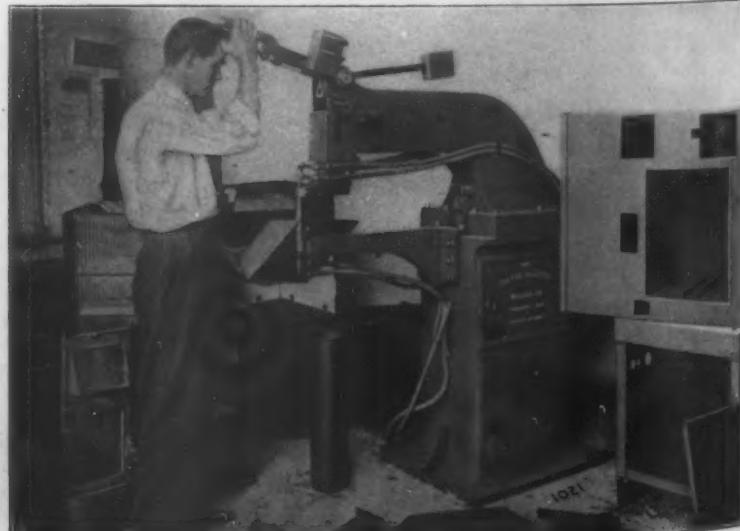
Welding Machine for Stove and Sheet Metal Work.
